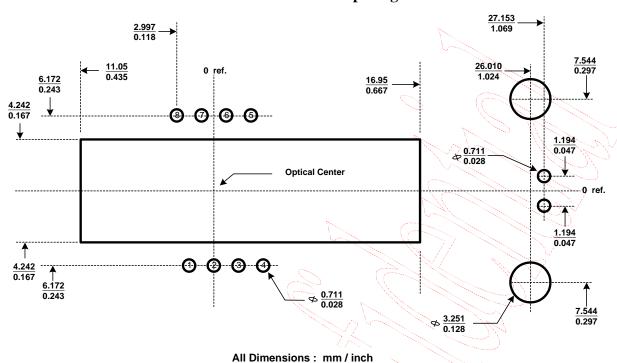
Recommended PCB Mechanical Cutouts and Spacing
